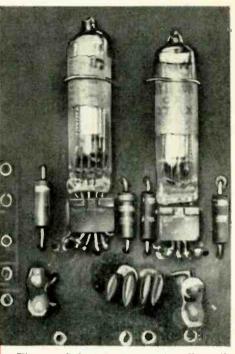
Subminiature push-pull oscillator parts mounted on circuit board.
